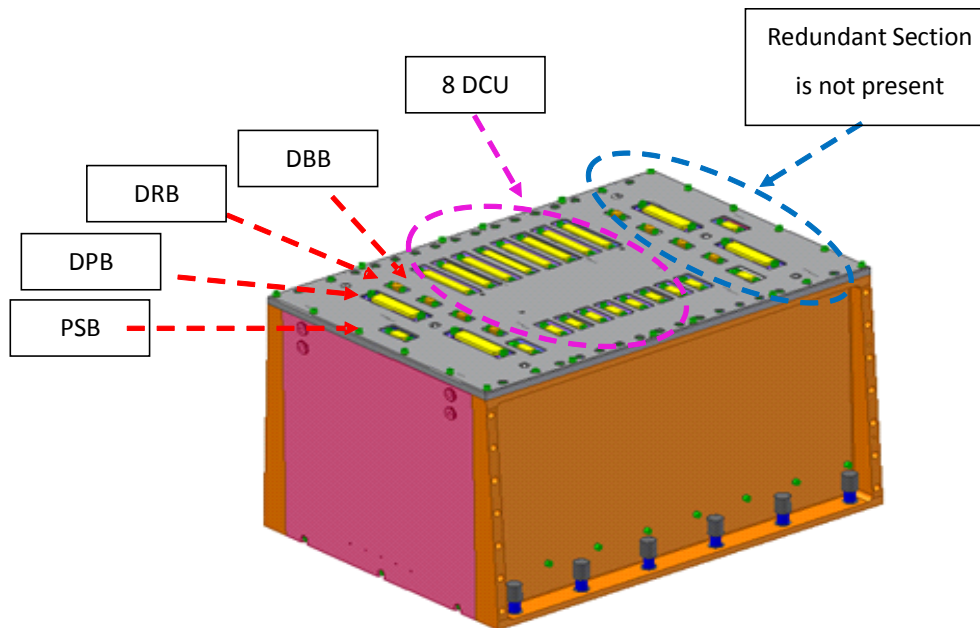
CAD drawing of the external chassis of the DPU/DCU EQM unit. It is equipped with the Power Supply Board, the Data Processing Board (Maxwell SCS750) the Double Buffer Memory Board, the Data Router Board and 8 DCUs. The redundant section is not present.
